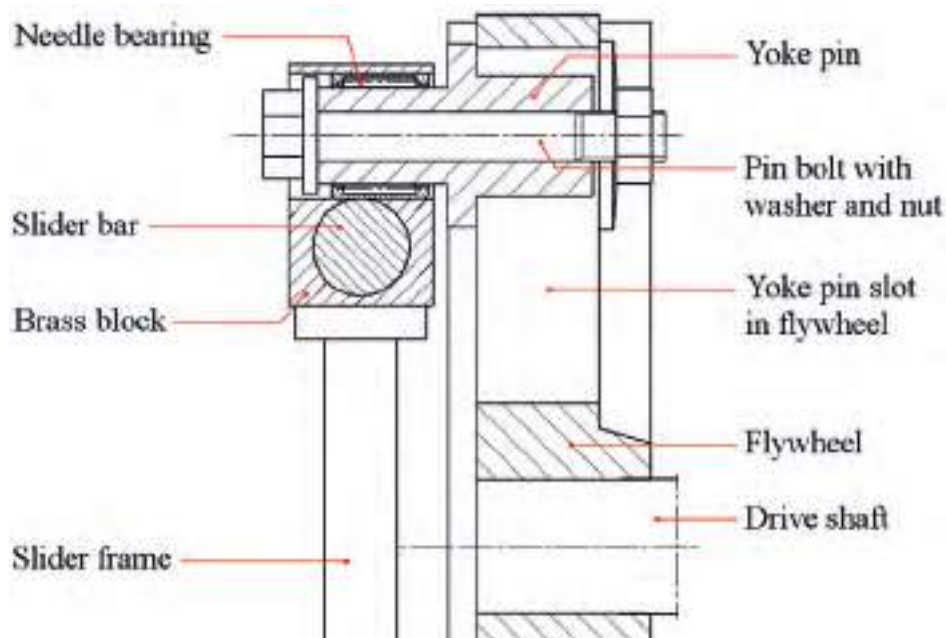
Cross-section of motion conversion mechanism central unit
